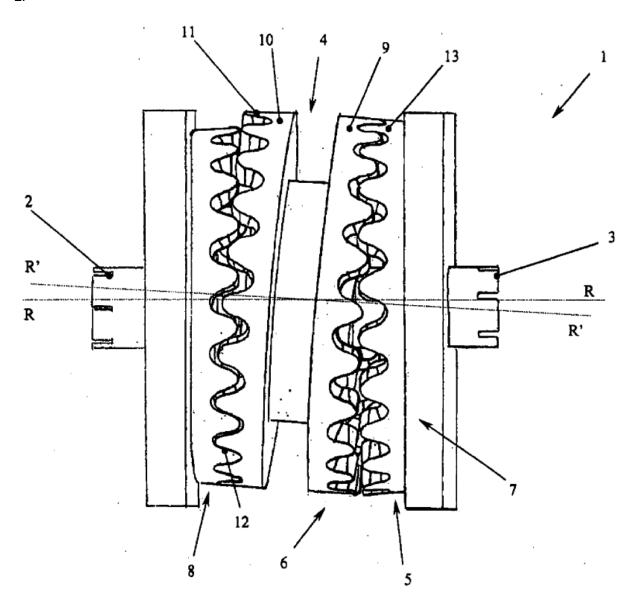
illustrates a planetary gear set in which orbital gears (9) and (11) are nutating.
